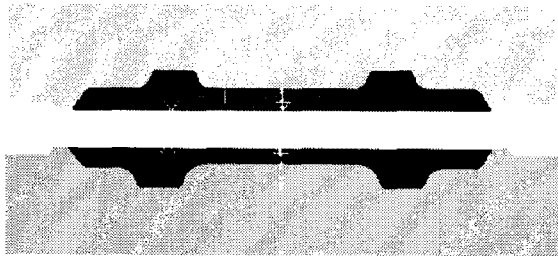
Closed-die forging die of 2nd stage turbine disk
